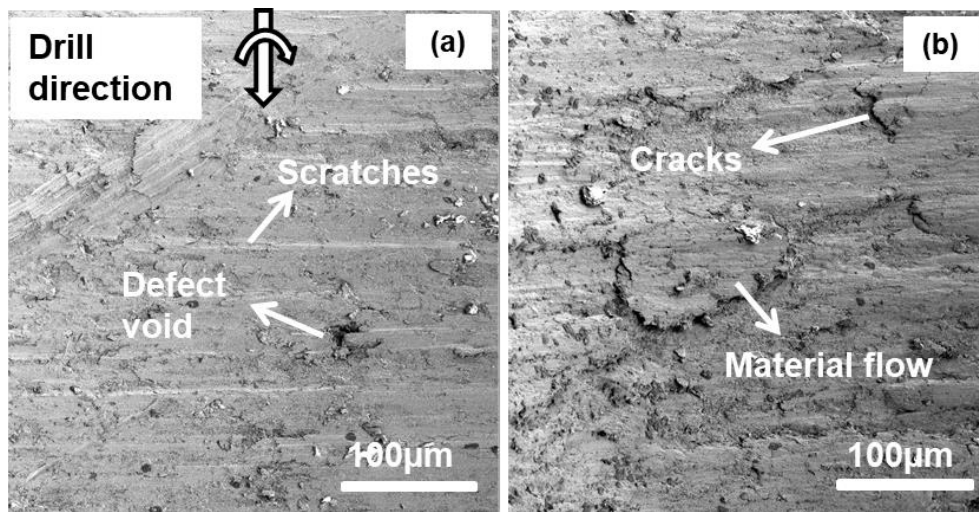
26 Surface morphology of the machined surface (a) scratches and particle pullout in point angle 90° drilled surface and (b) material flow and cracks at point angle 135° drilled surface.
